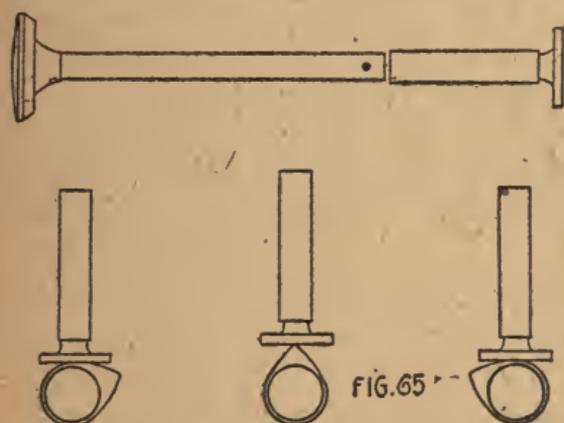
Showing the valve and cam follower assembly and how the cam follower is actuated by the cam.
